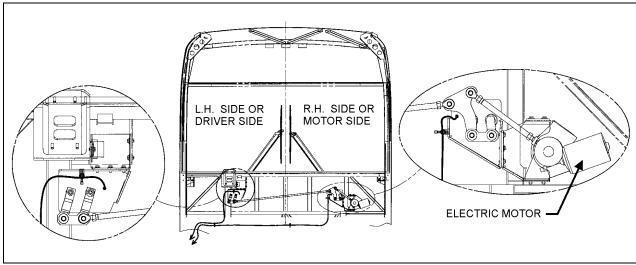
WINDSHIELD WIPER INSTALLATION
